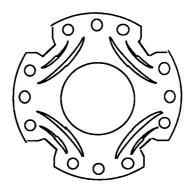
Illustrating Rotor Punching of Laminated Type Synchronous Reluctance Motor.
